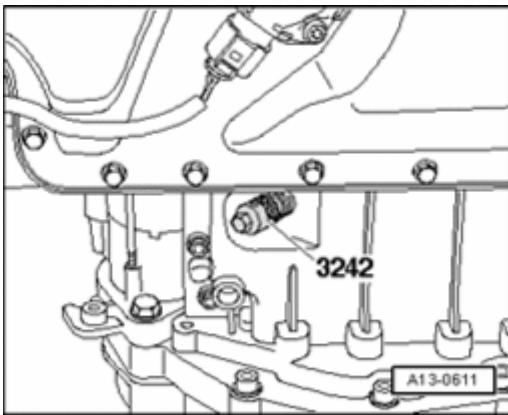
Removing/Installing Crankshaft Holder 3242 Into Hole
